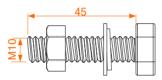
Dimensions of fastener for metal frame (figures in mm)
